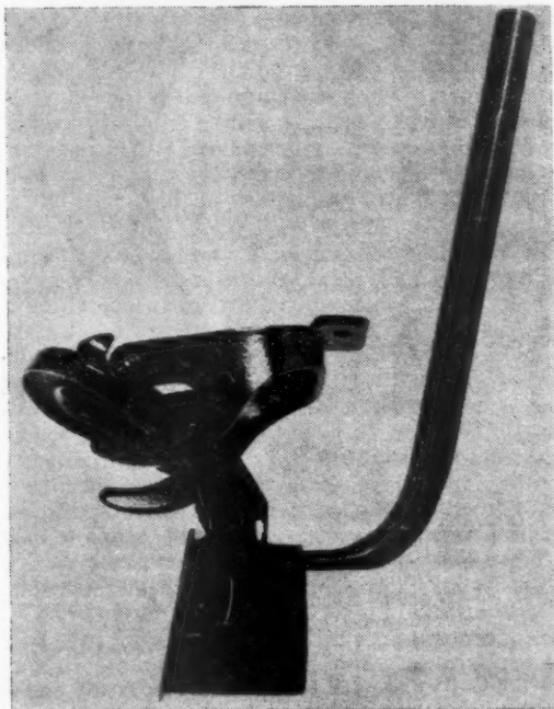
Snap-on cover assembly for jerrycan. All the parts are steel pressings except the air-vent tube, which is deep-drawn. (*Courtesy of the C.S.A.R.D.*)
